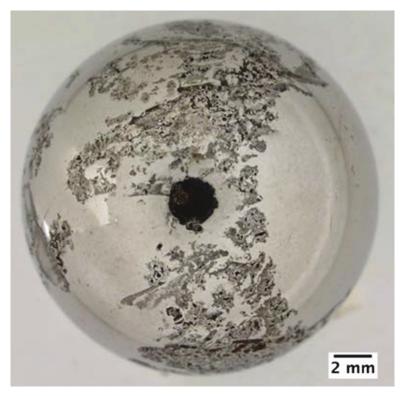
Rolling element from the subject bearing showing extensive pitting and surface corrosion
